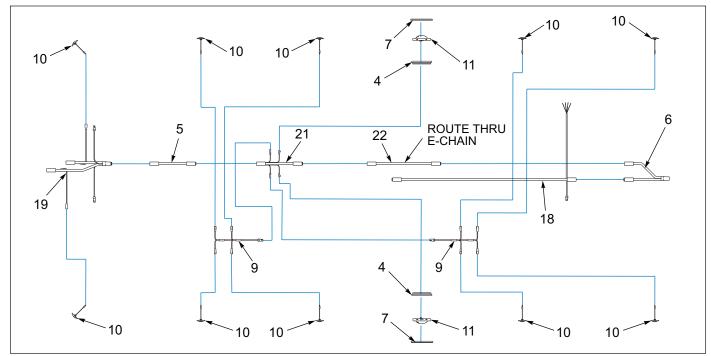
Short Bed Frame Assembly (2 of 2)
